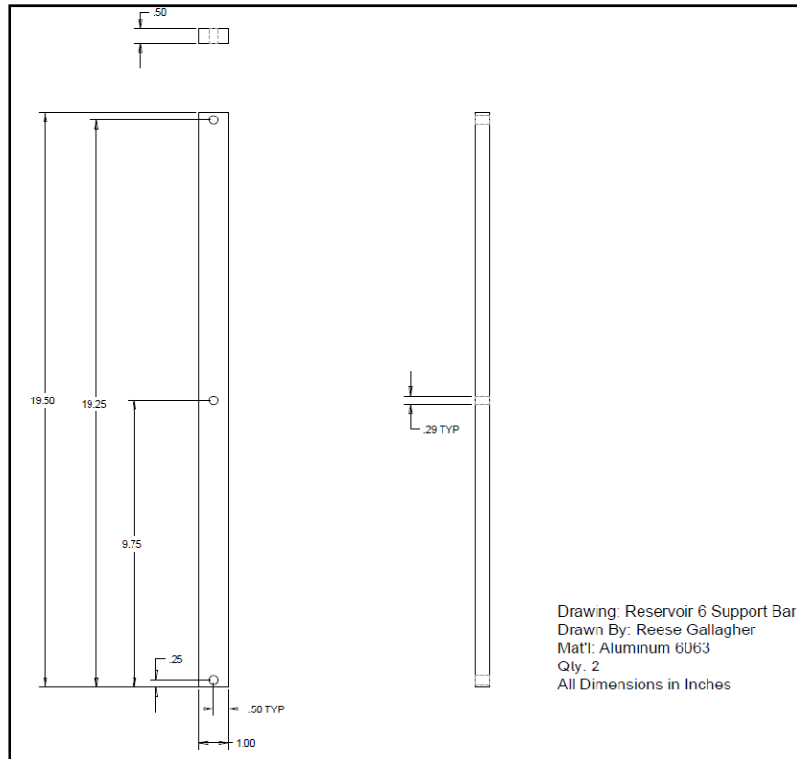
Reservoir 6 Support Bar Dimensional Drawing
